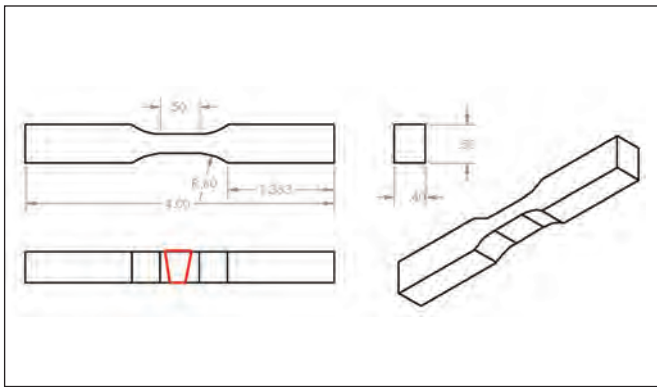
Stress-relief cracking test sample design with the weld location (red) in the gauge section.
